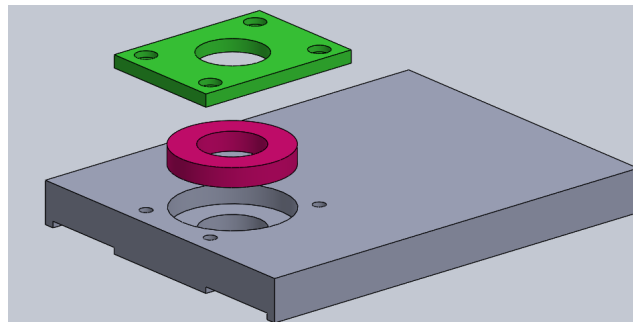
In grey we have the A/P plate, in red the ball bearing, and in green the metallic thrust
